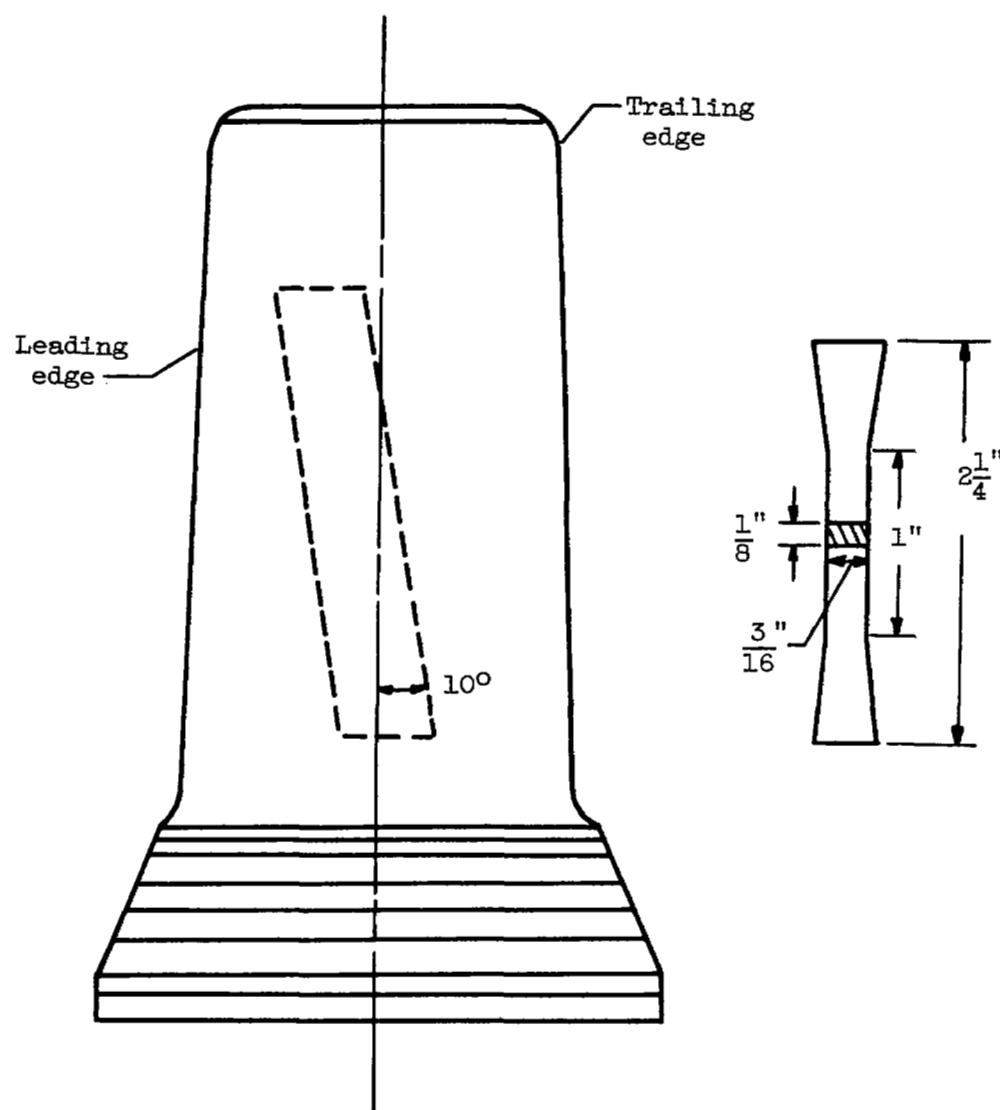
Blade stress-rupture specimen and zone from which it was machined.
